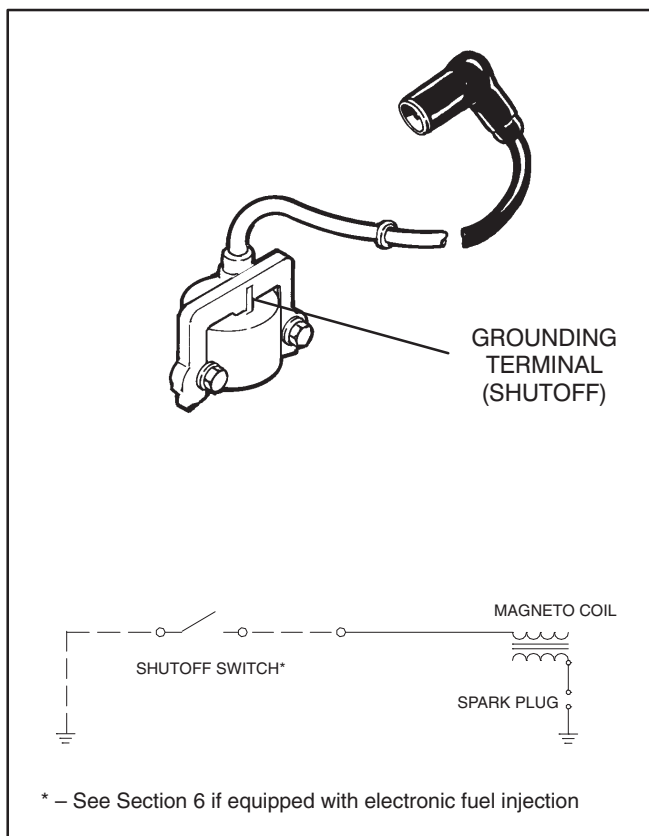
MAGNETO COIL ASSEMBLY
